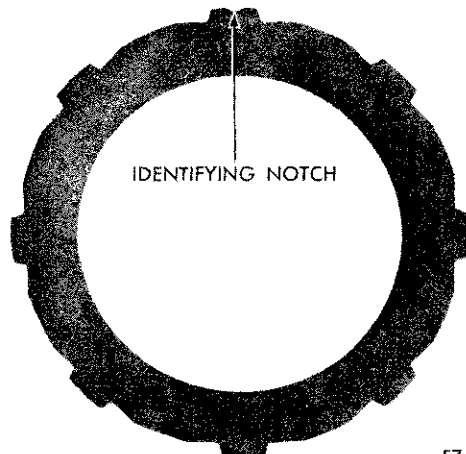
Identification of Front Clutch Piston Spring Retaining Plate
